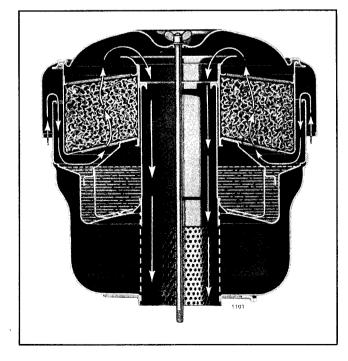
Light Duty Oil Bath Type Air Cleaner
